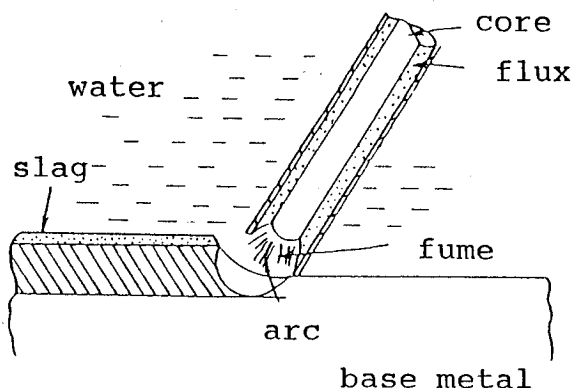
Schematic drawing of wet underwater welding
